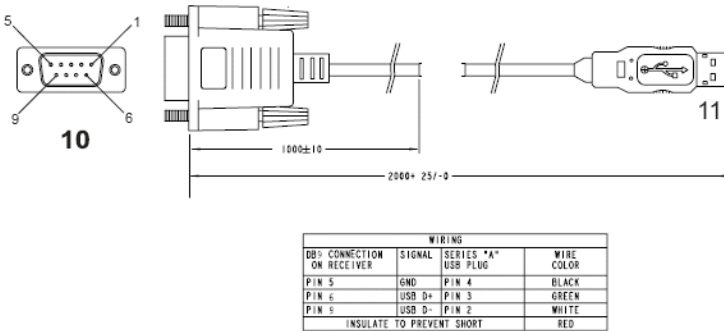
USB to DB9 serial cable (dimensions in millimetres)
